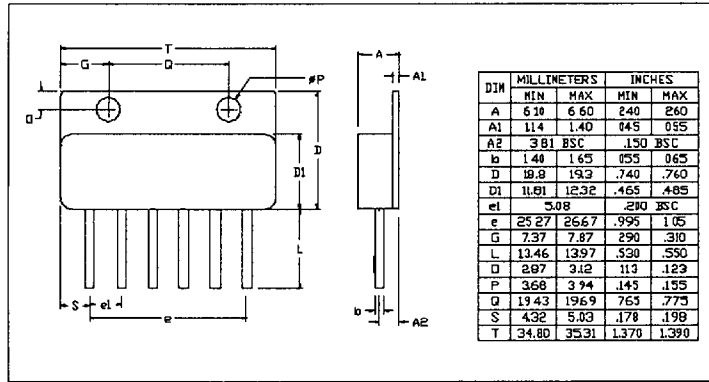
STRAIGHT LEAD 6 PIN TOP MOUNT (S-SUFFIX)
